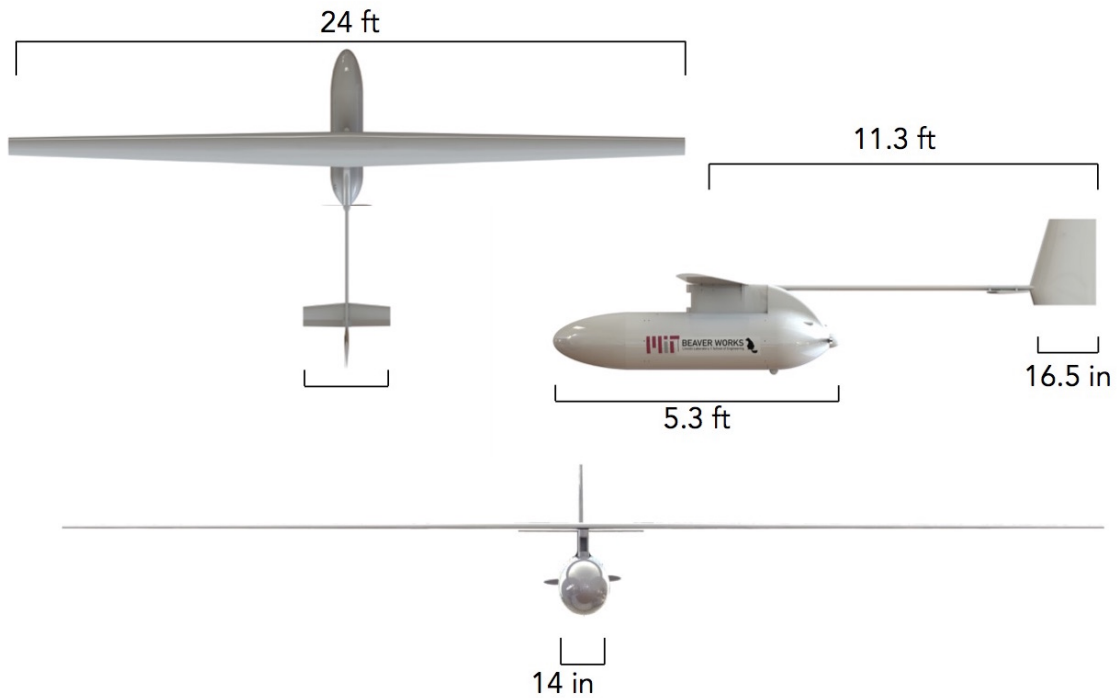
Dimensioned view of the Jungle Hawk Owl.
